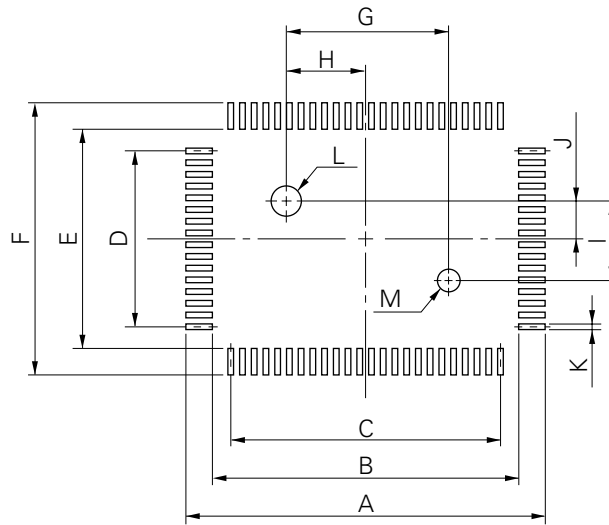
Drawing of Conversion Socket (EV-9200G-80)
